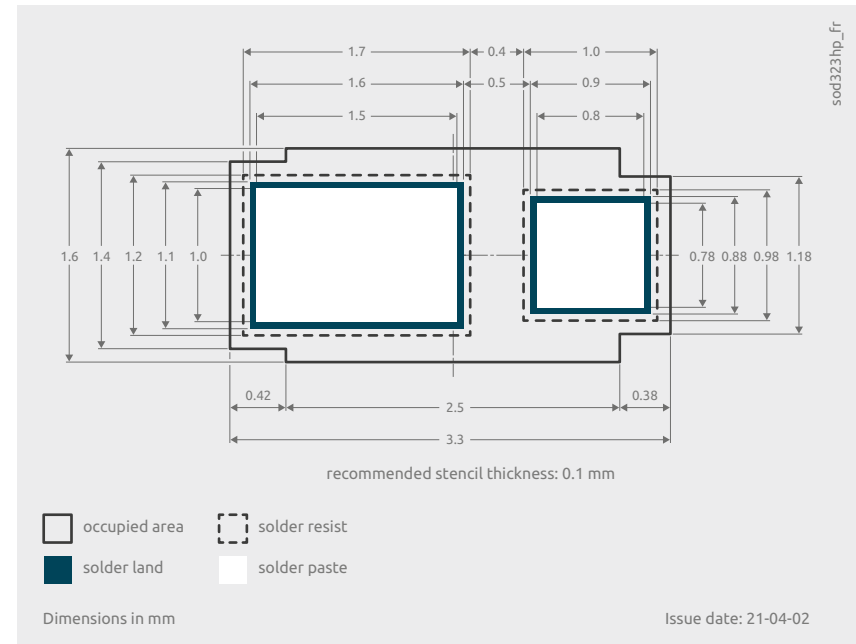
Reflow soldering footprint for CFP2-HP (SOD323HP).
